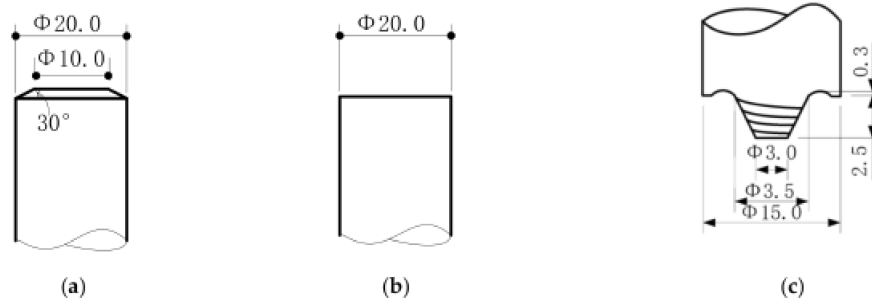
The sketch of the upper and lower electrode and the tool for friction stir spot welding (FSSW) (unit: mm). (a) upper; (b) lower; (c) tool for FSSW.
